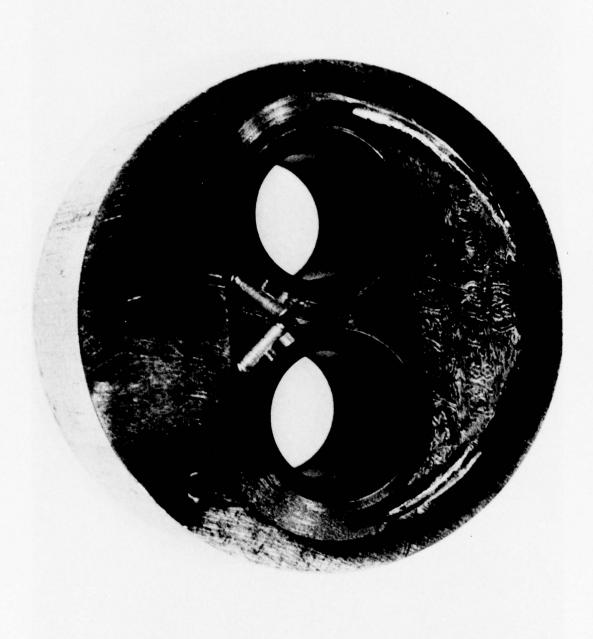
Supply Pump Front Bearing Assembly Package No. 1
